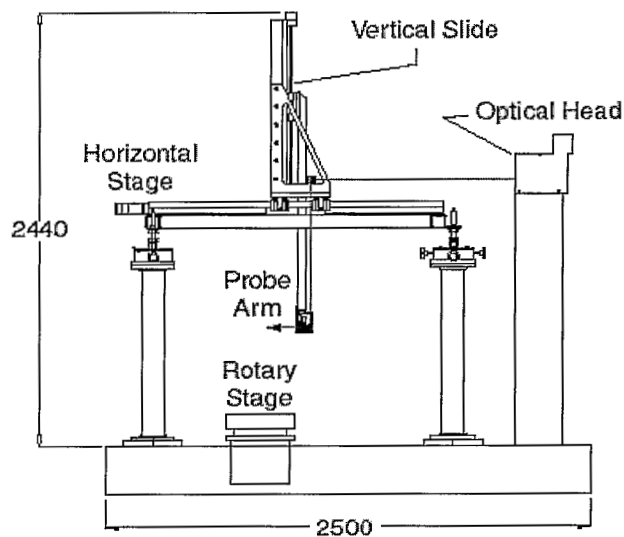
Schematic of Vertical Scan LTP configured for 3D measurement of complete Wolter telescope x-ray mirrors and mandrels. Penta prisms direct the beam onto the test object that mounts on the rotary stage. Dimensions in millimeters
